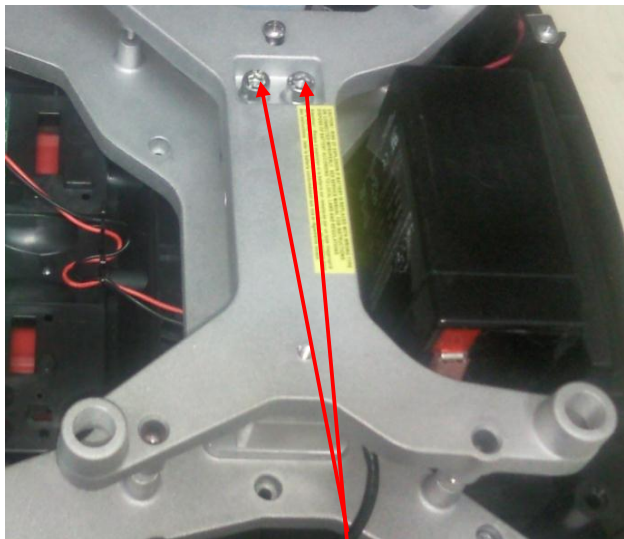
Remove the bolts holding Frame to the Load Cell.
